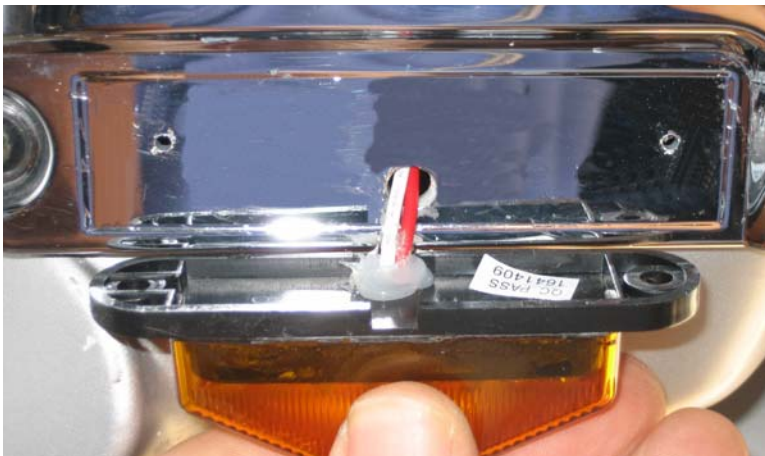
Screw locations on bottom of 2003 Tip-Over Wing cover (this cover is cut out for Bob's Highway Pegs). 2005 and later models have a courtesy light in the bottom of the cover.
